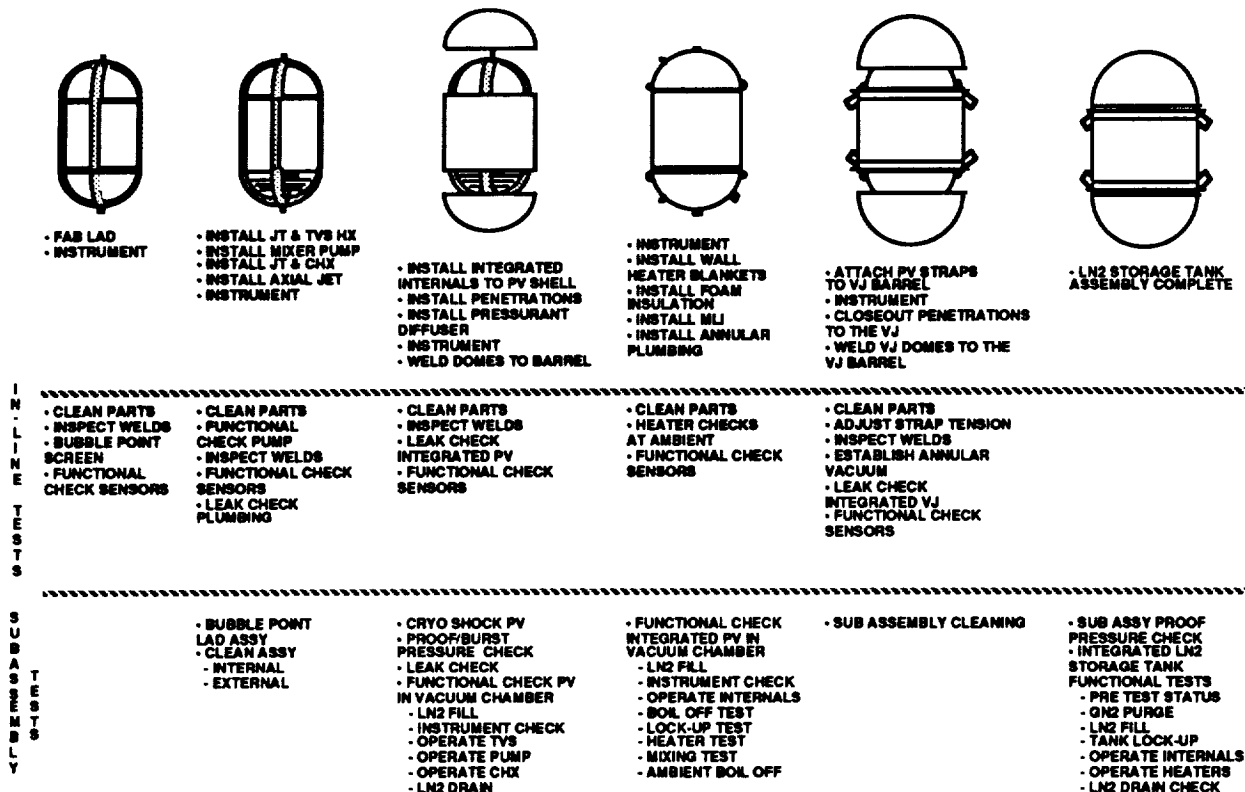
LN2 Storage Tank Fabrication and Test
